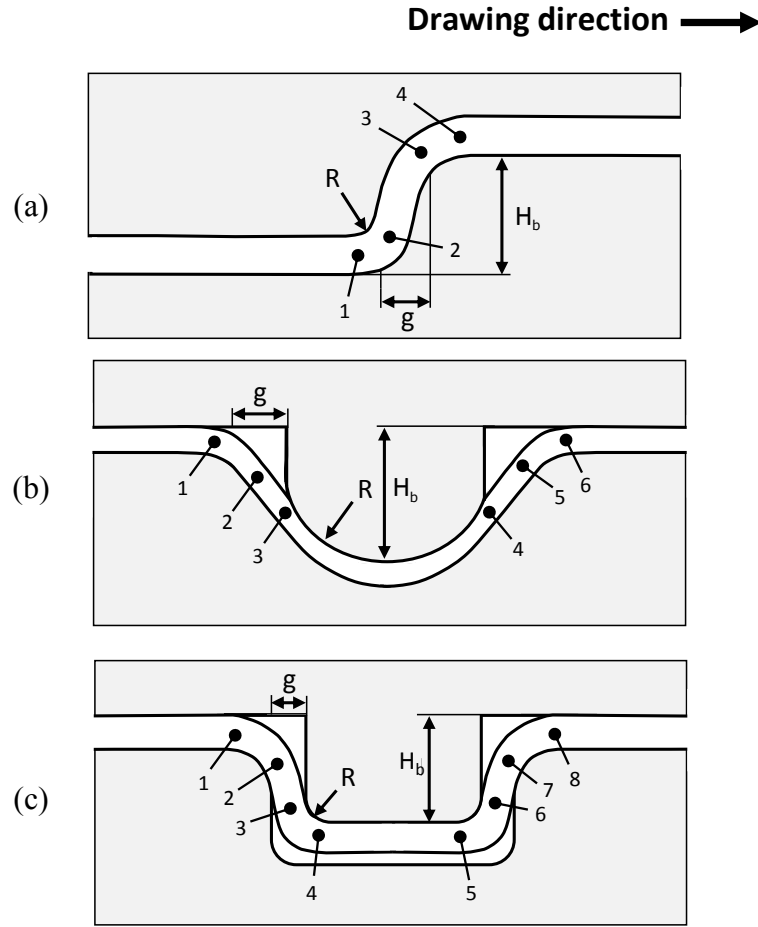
Overview of the most common drawbead geometries: (a) stepped drawbead (edge drawbead), (b) Semi-circular drawbead (c) rectangular drawbead [89].
